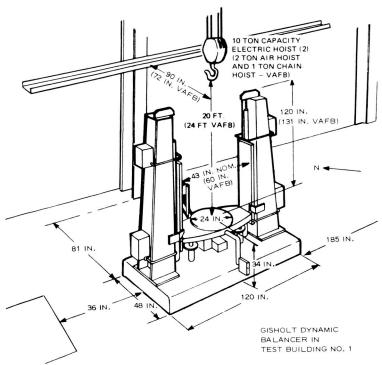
TEST BUILDING NO. 1 - BALANCING EQUIPMENT - WFC
